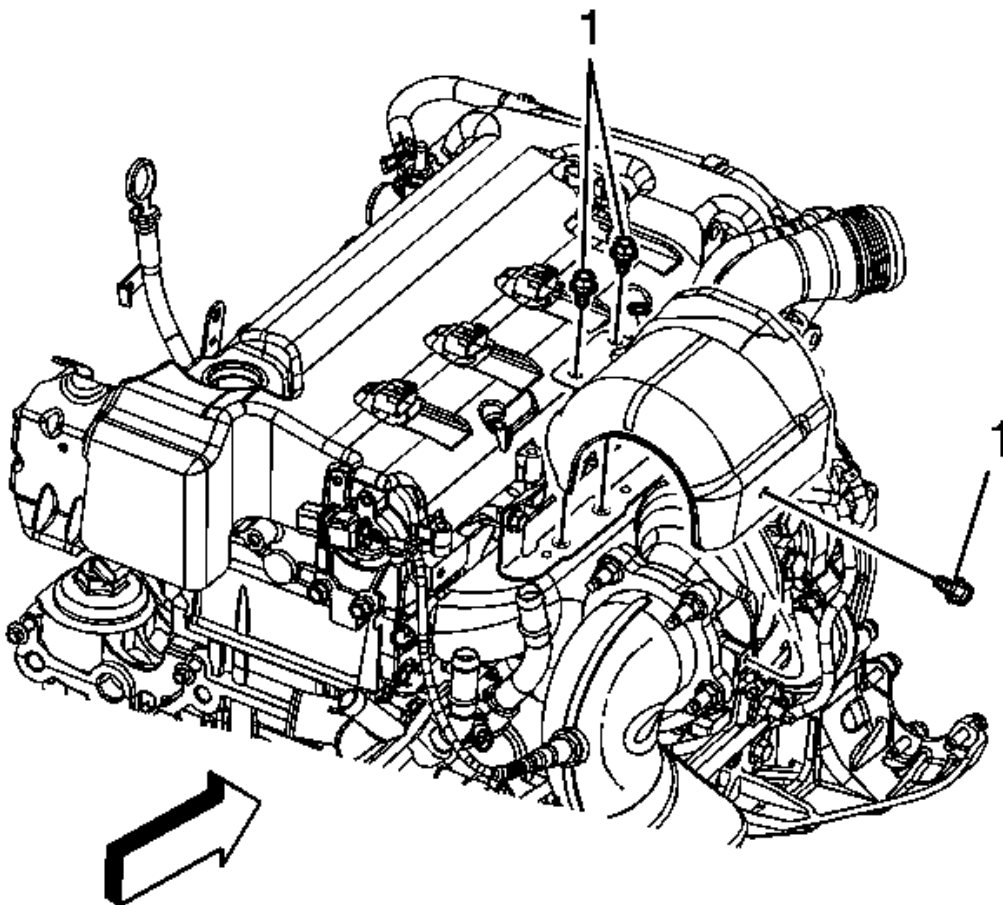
Identifying Turbocharger Heat Shield & Bolts
